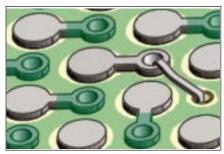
Insert a copper foil jumper into the plated hole and Teflon sleeve.
